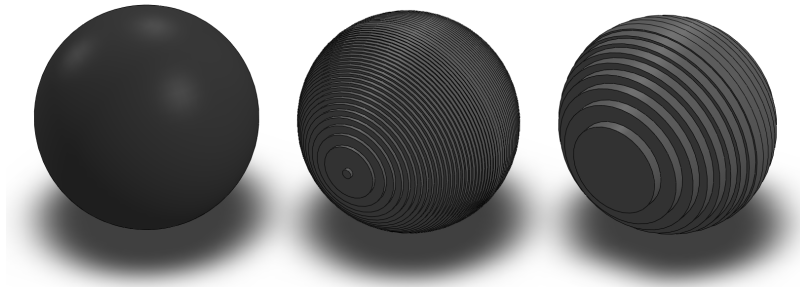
A rendering illustrating the effects of layer thickness on part definition. The desired part geometry (left), the layered assembly using layer thickness of 1 unit (middle), and the layered assembly using layer thickness of 3 units (right).
